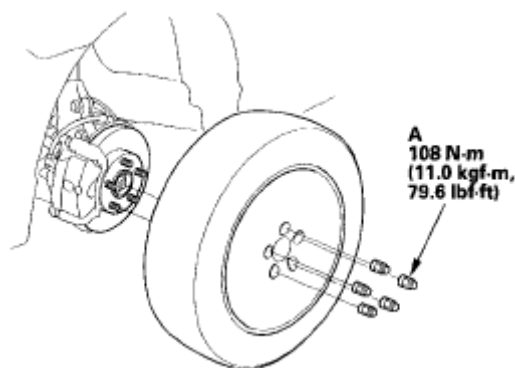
Identifying Front Wheel And Nut (With Torque Specifications)
